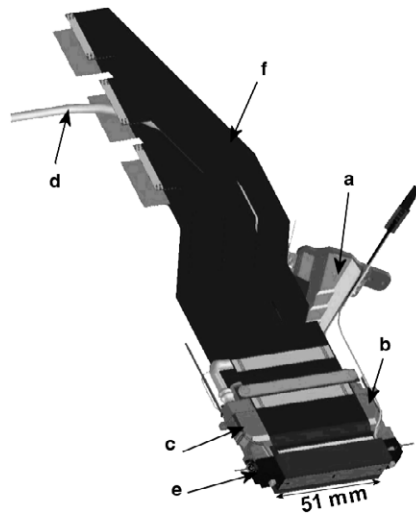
3D CAD drawing of a printhead prototype, developed at Océ, showing (a) the melting unit, (b) the filter units, (c) the reservoir, (d) the static pressure hose, (e) the central part, and (f) the electronic driving supply.
